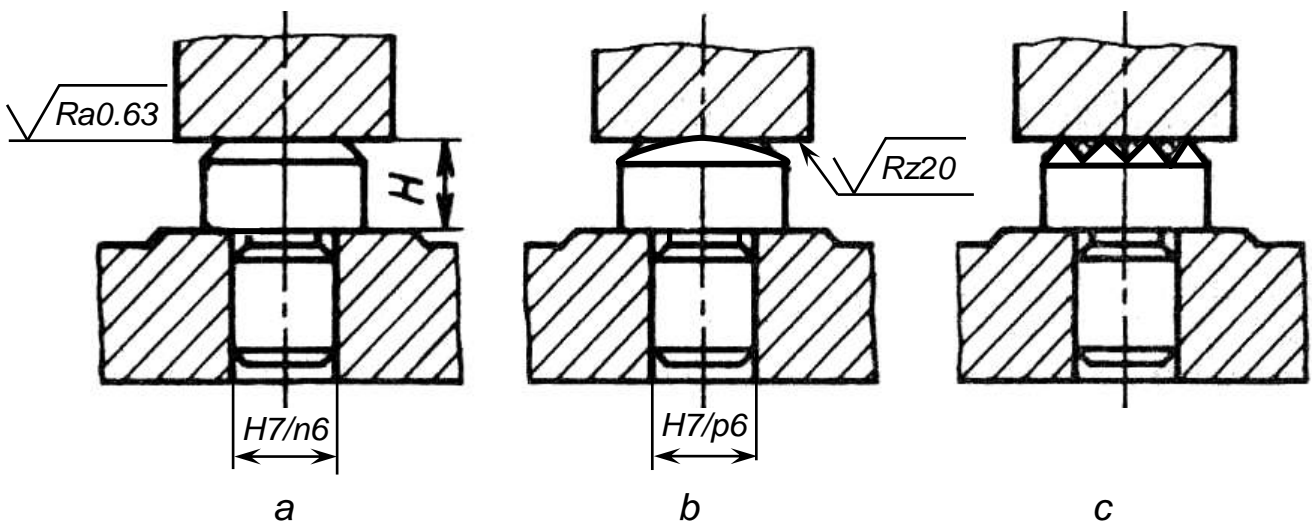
Designs of rigid rest pins: a – with flat head; b – with spherical head; c – with knurled head
